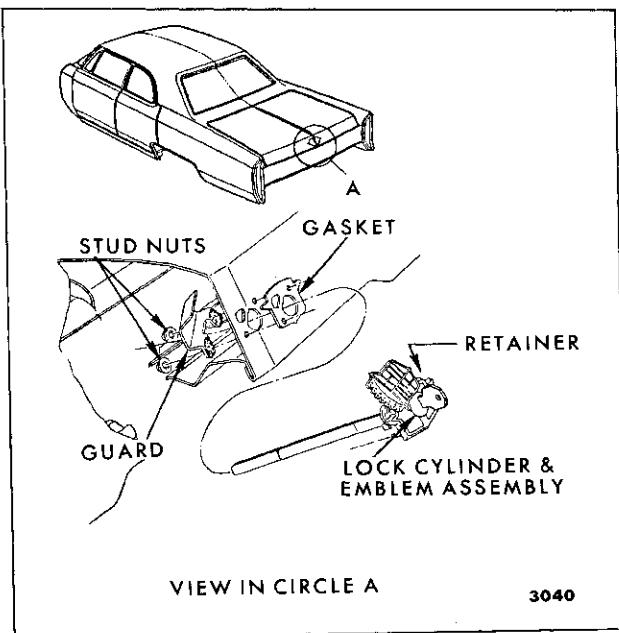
Rear Compartment Lid Lock Cylinder Assembly — All Cadillac Styles
